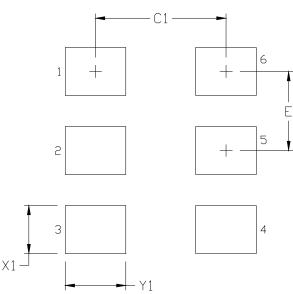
Si530/531 PCB Land Pattern Table 14. PCB Land Pattern Dimensions (mm)
